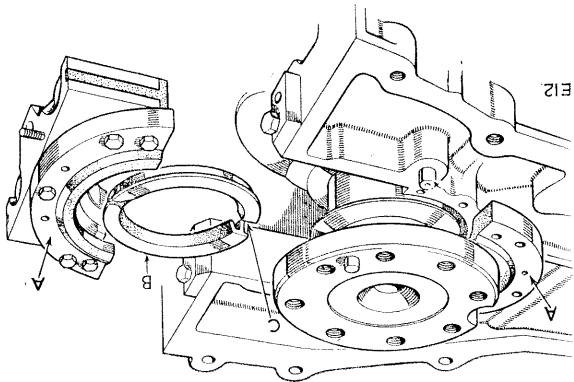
A—Fitting retainer halves and oil seal (3-piece type)
